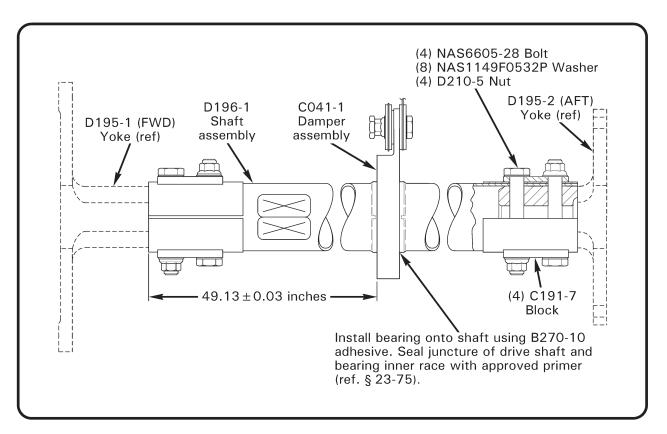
A D196-1 TAIL ROTOR DRIVE SHAFT
